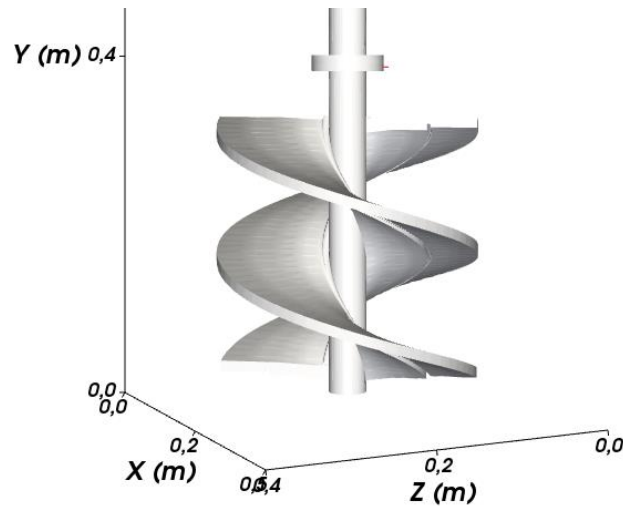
Vertimill VTM-1500 screw 3-D geometry
